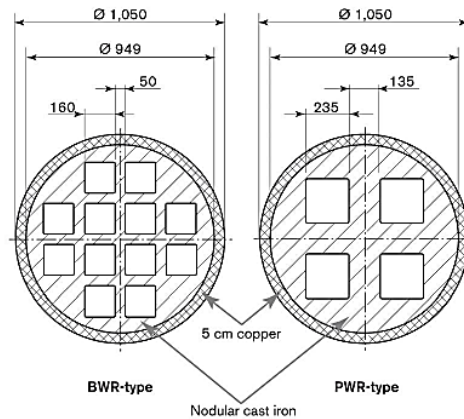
Cross-section view of BWR and PWR type fuel assemblies (all dimensions given in millimetres, unless otherwise indicated). Image courtesy of SKB [4,5].
